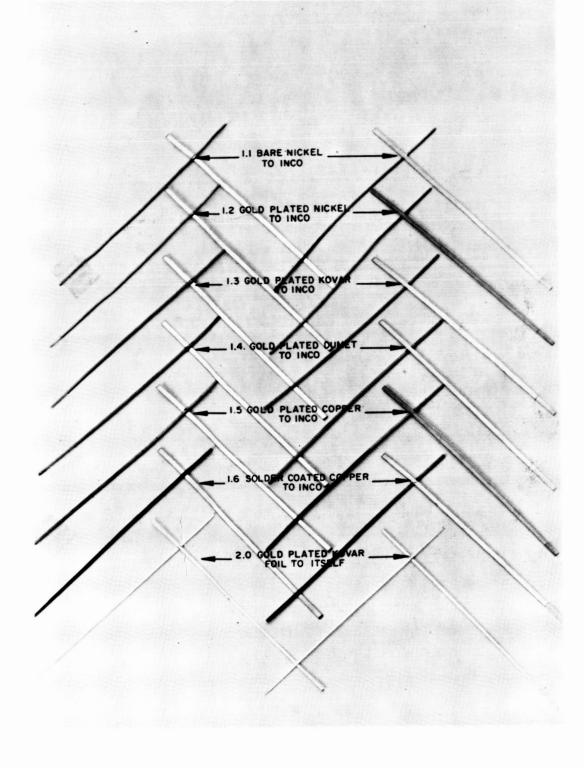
Photograph of the seven types of weld-joint specimens (R105348).
